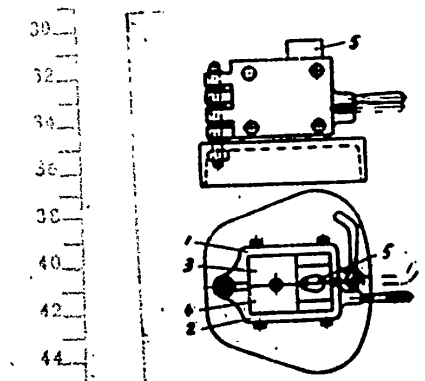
Metal Mold of Folding Type: 1 and 2, Folds; 3 and 4 Halves of Mold; 5, Casting Cup.
